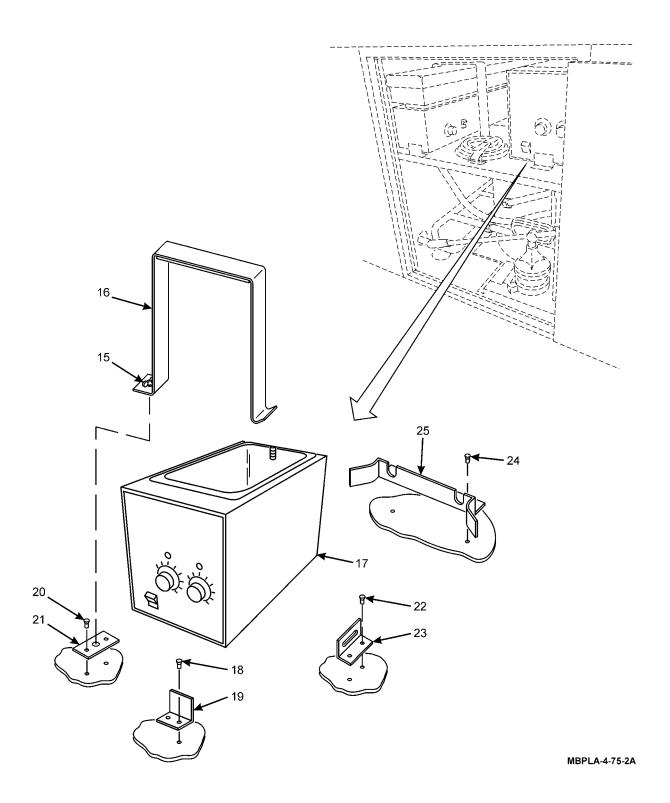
Hot Plate, Water Bath, Grease Working Machine, and Brackets (Sheet 2 of 3)
